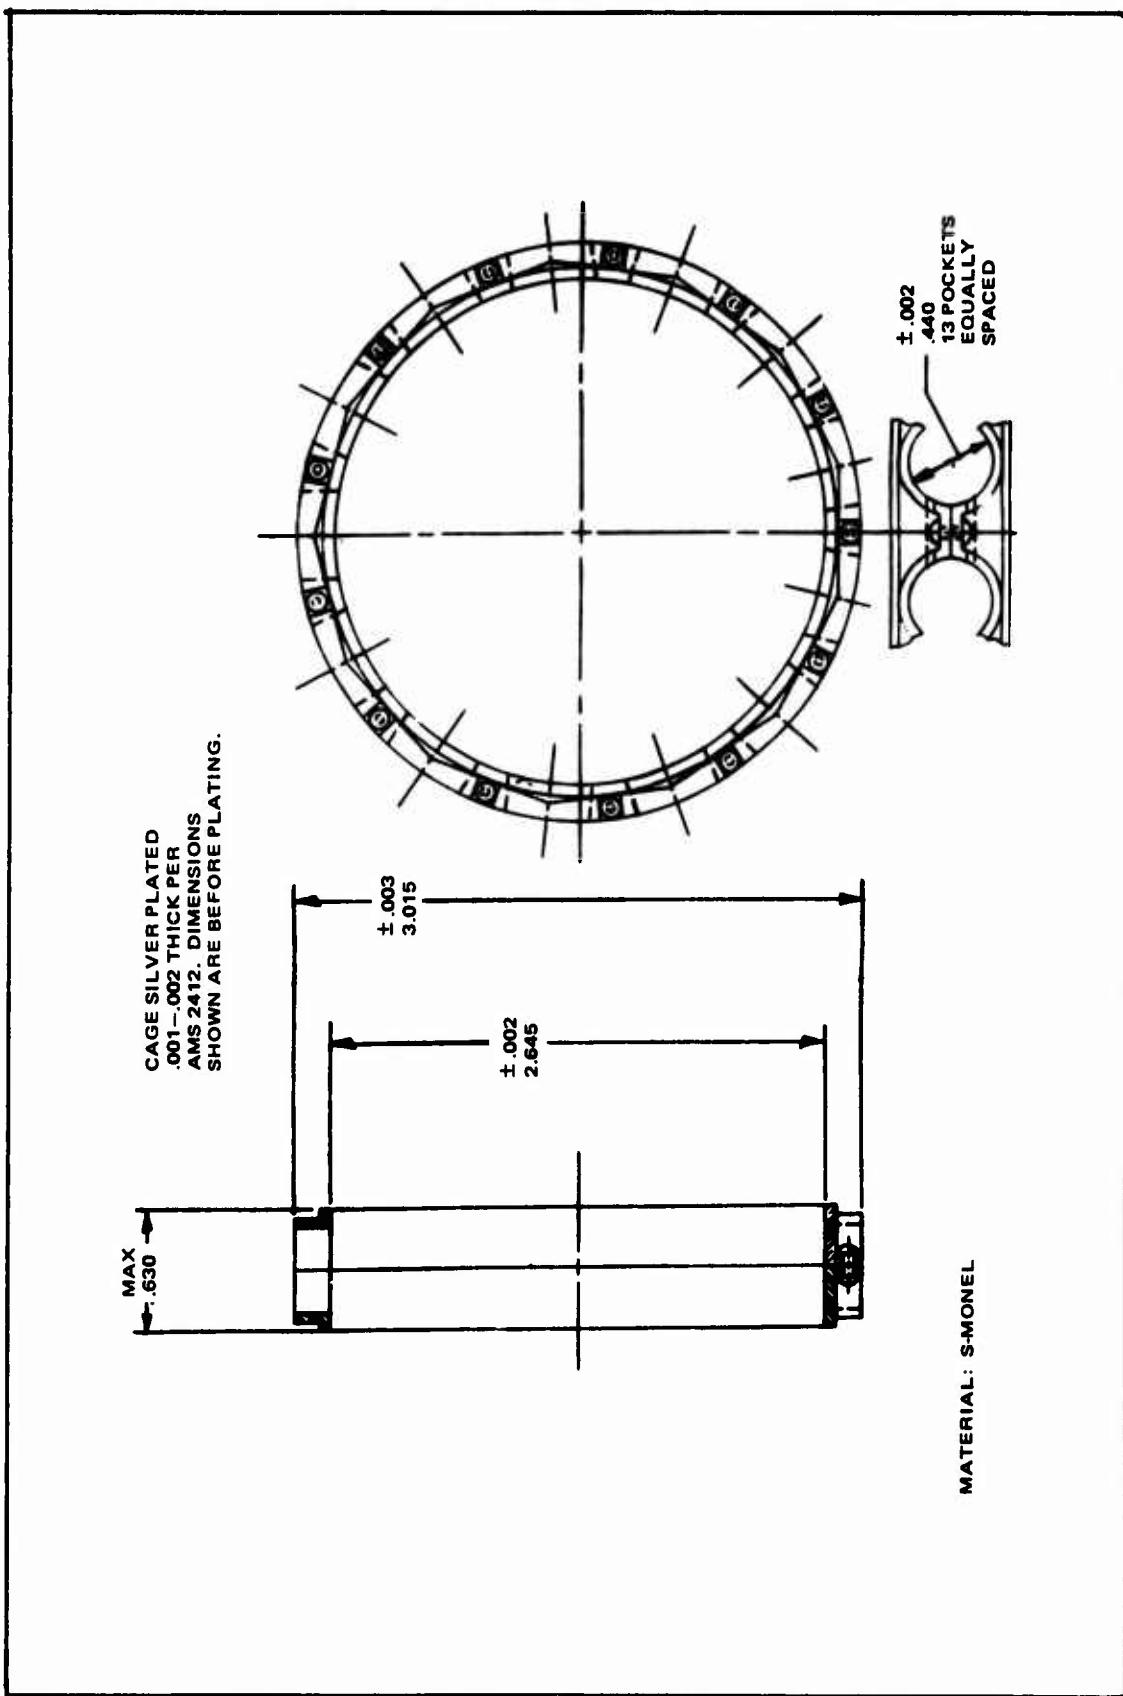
Machined Inner-Land-Riding S-Monel Cage, Design 3.
